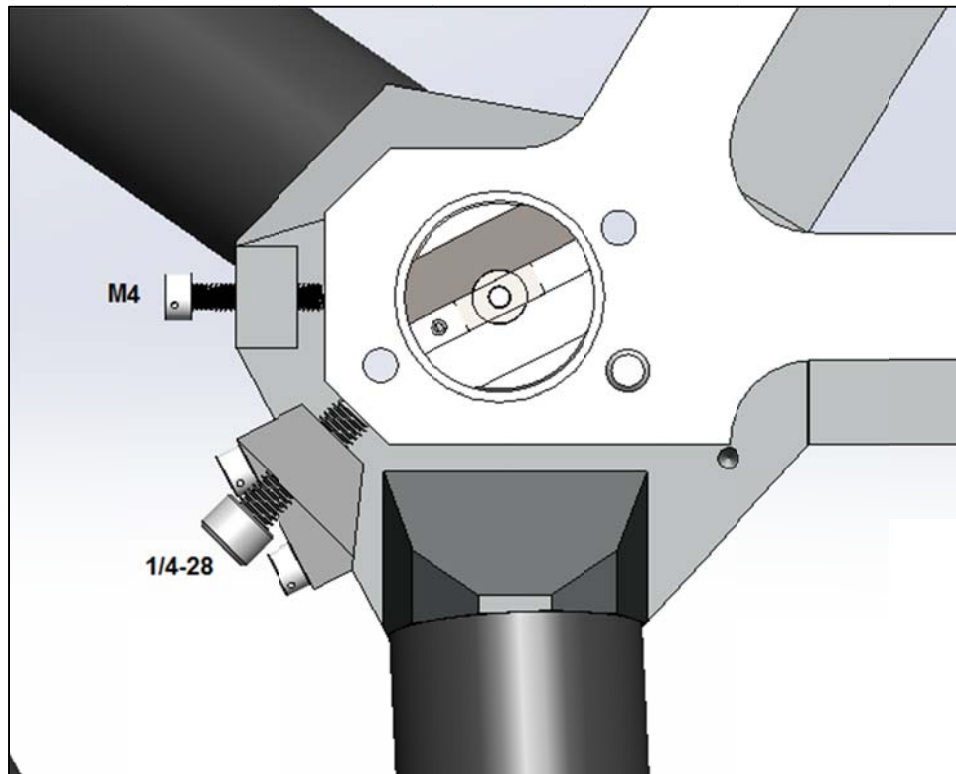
Groove Lock off axis position components and hardware. Note that Swing-Arm HW is M4 and the Groove Lock component is 1/4-28. Hardware is drilled head for safety wire after final alignment.
